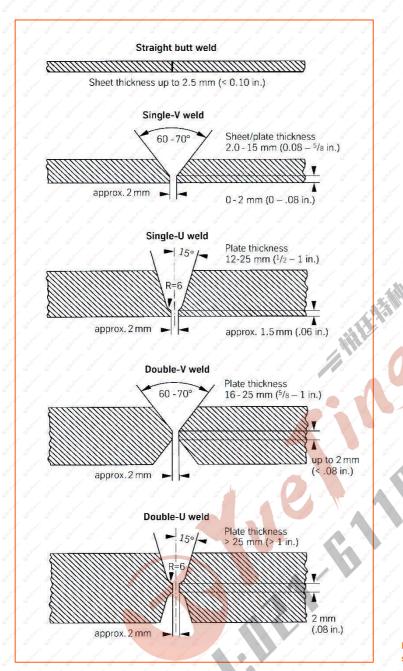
Edge preparations for welding nickel alloys and special stainless steels
